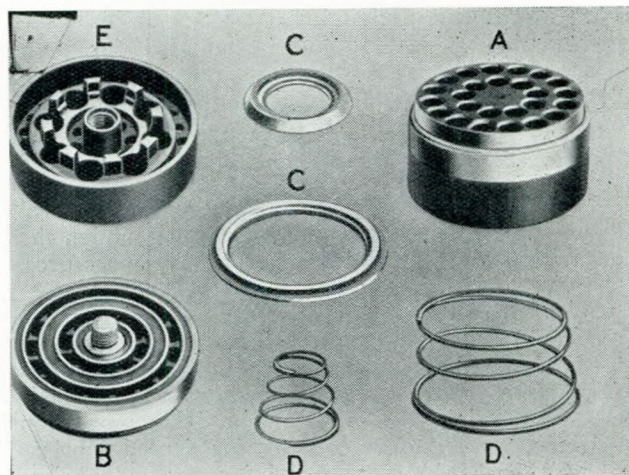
Parts and complete assembly of an ammonia refrigerating compressor plate valve.
